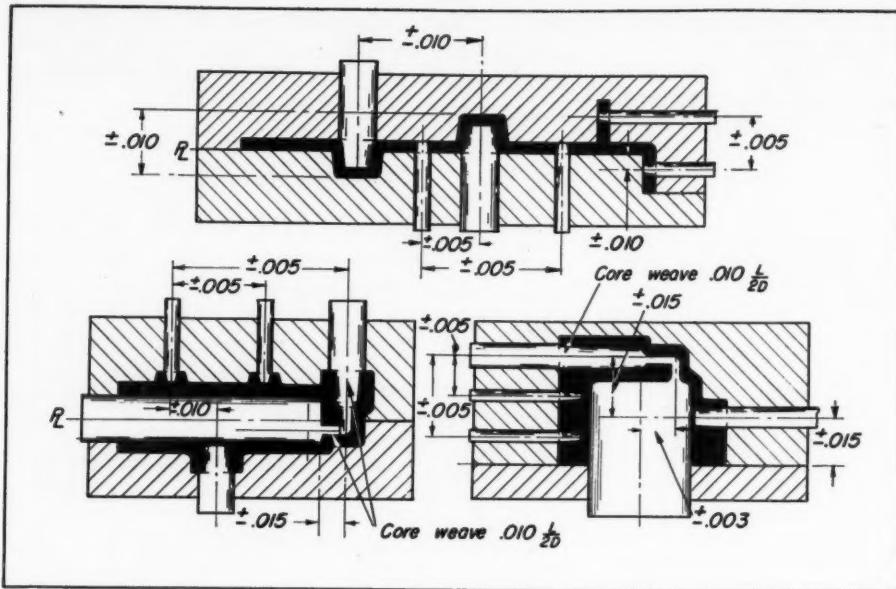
Diagrammatic sketch showing dimensional tolerances that can be maintained between various points within a pressure molding die (drawing, courtesy H. L. Harvill)
